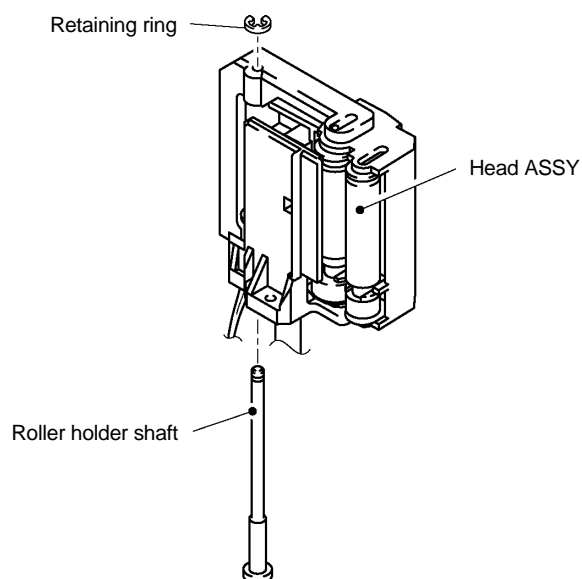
Reassembling the Head/Roller Holder Unit (3)
